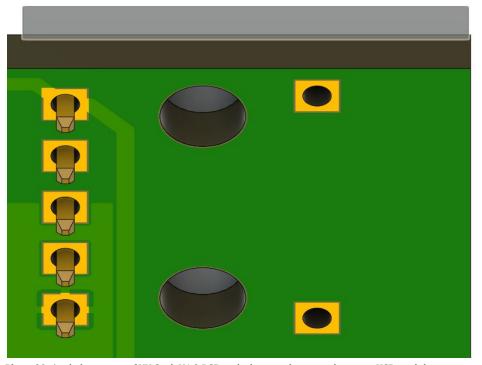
Angled top view of VU Stick V1.2 PCB with micro USB module and pins.
